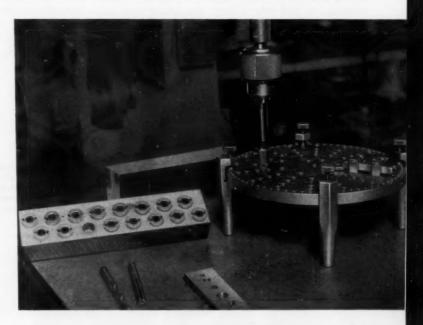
Close-up view of a universal jig plate. Dividing mechanism at the top can be employed to position the workpiece at any desired angle with respect to the plate.
